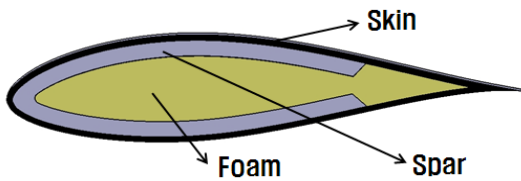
Schematic blade sectional view with the skin-spar-foam sandwich
